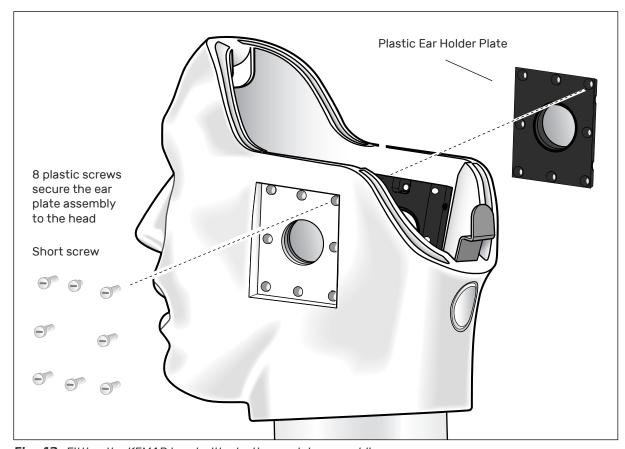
Fitting the KEMAR head with plastic ear plate assemblies.
